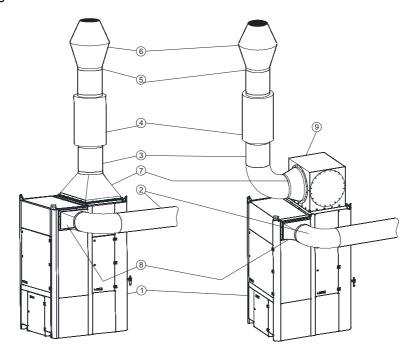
Z-LINE 9 - CONNECTION OF INTAKE AND EXHAUST PIPING
